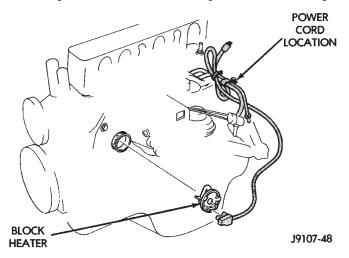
Heater and Cord— 2.5L 4-Cylinder Engine
